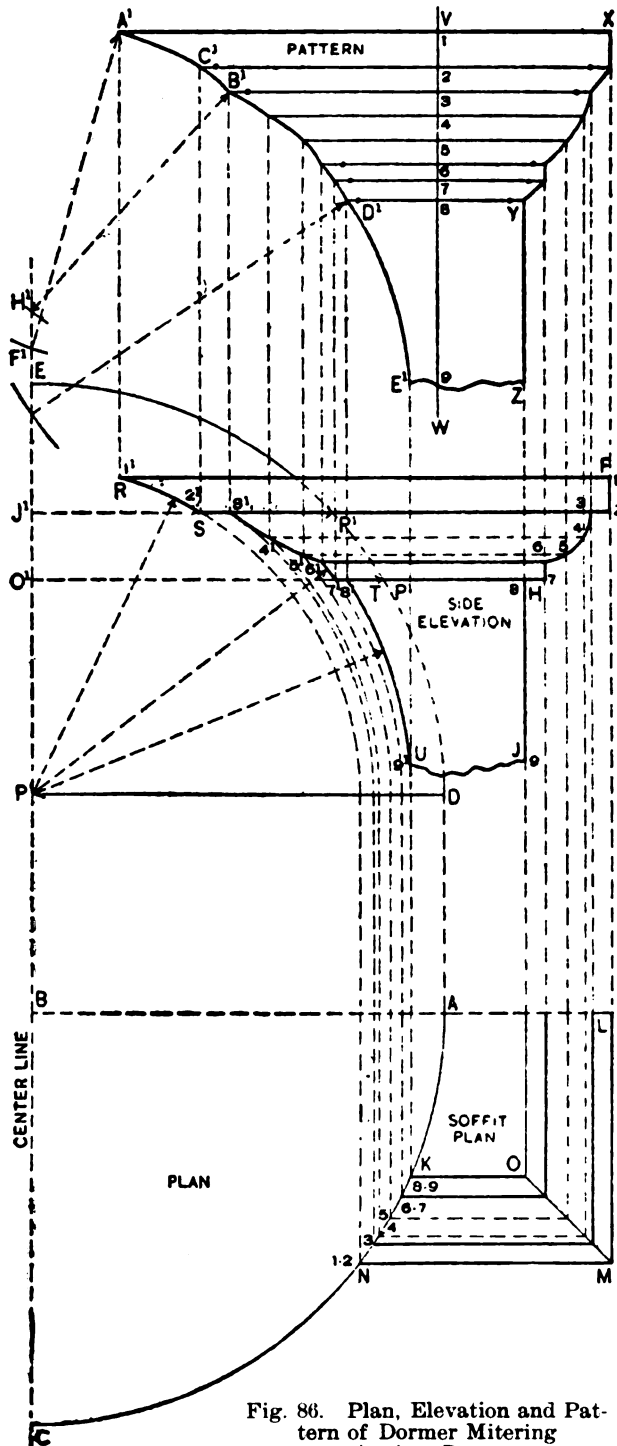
Plan, Elevation and Pattern of Dormer Mitering Against Dome
